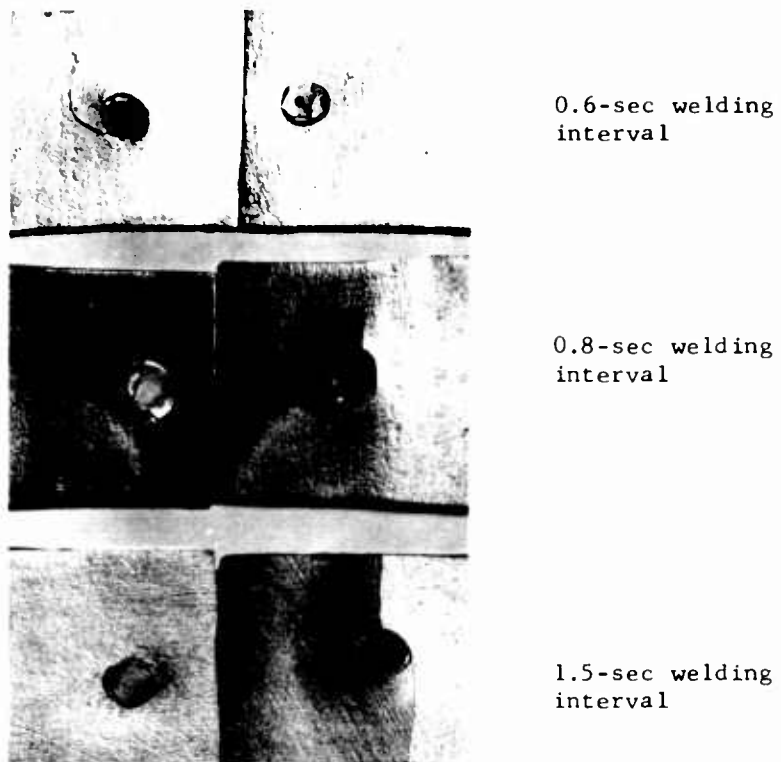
Weld area growth and nugget pullout in beryllium bonds after tensile-shear tests (power, 3800 watts; clamping force, 900 lb; tip radius, 9 in.)
